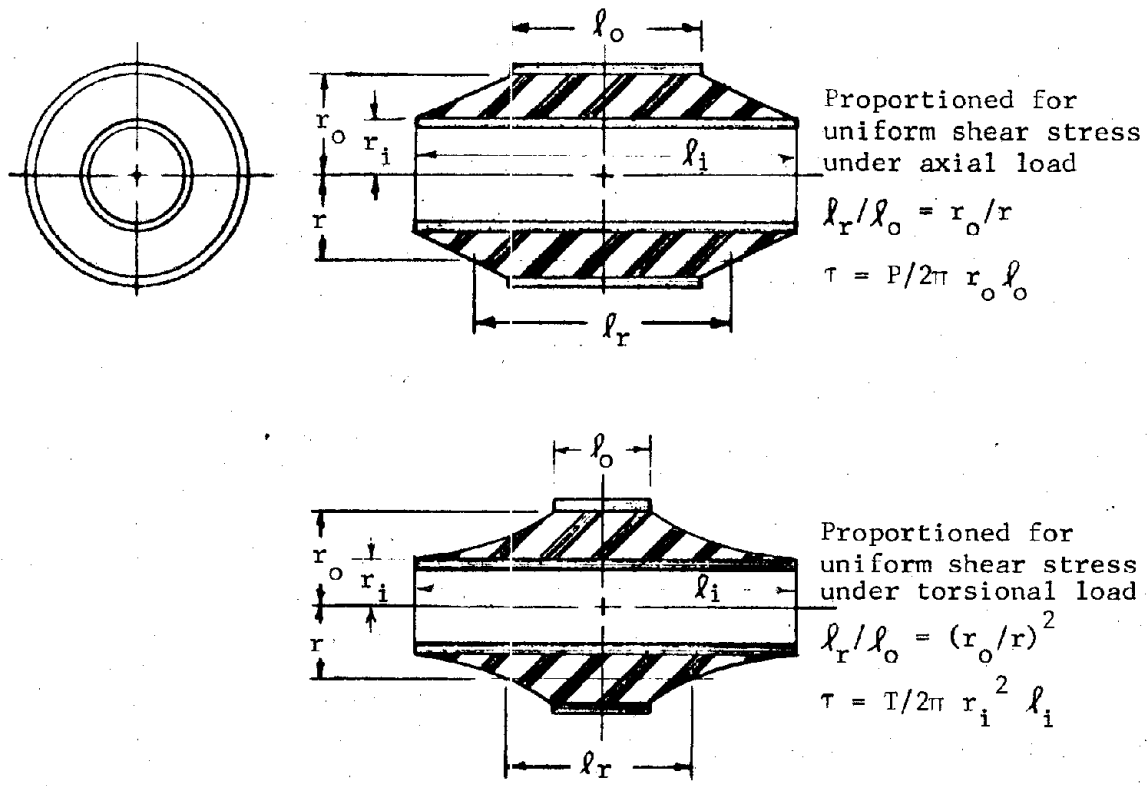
(b): CONCENTRIC BUSHING SHOCK MOUNTS
